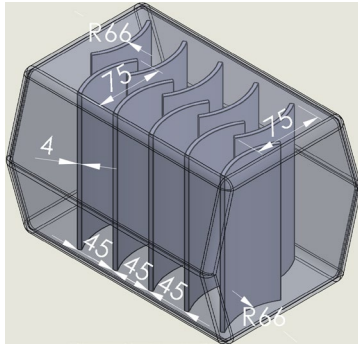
Dimensions of Tank 3 (all dimensions are in mm).
